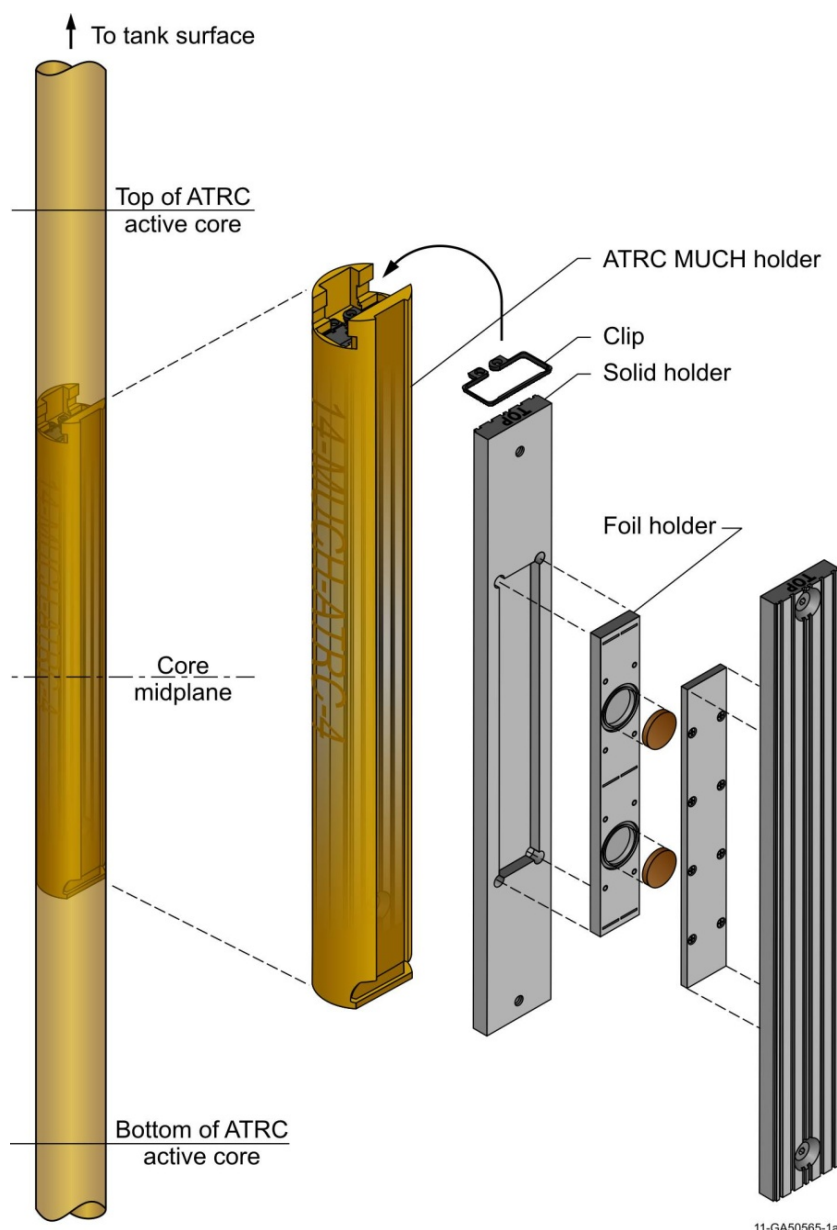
Southeast In-Pile Tube Insert Assembly (Low Water Fraction).
